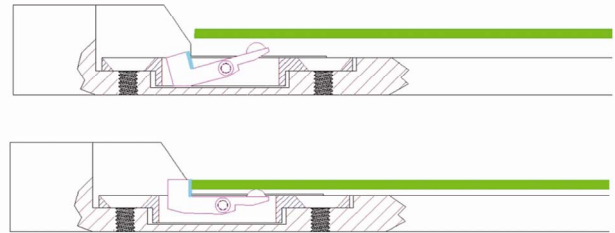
GEH end effector showing cam engagement mechanism on wafer. Wafer weight moves cam to contact wafer edge to hold it in place.
